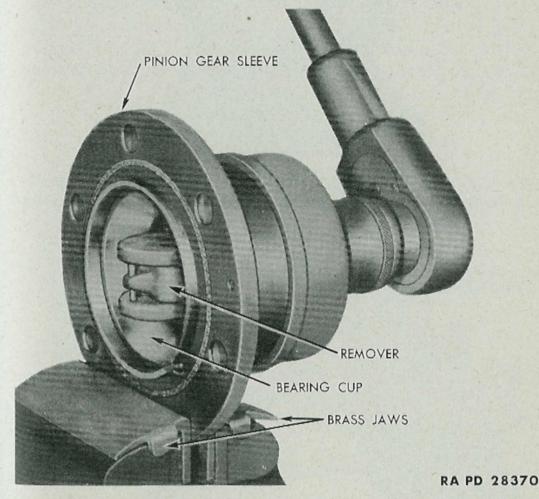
Removing Bearing Cups from Pinion Gear Sleeve with Remover 41-R-2384-41
